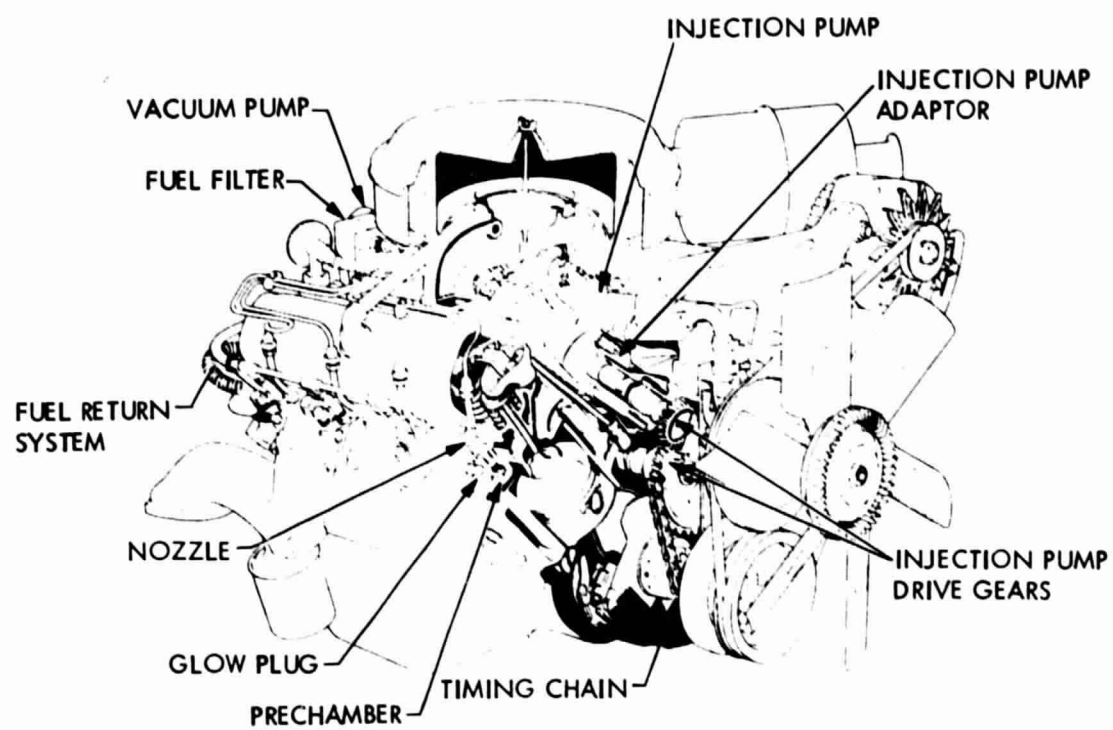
Cutaway View - Complete Olds V-8 Diesel Engine (Ref. 28)
